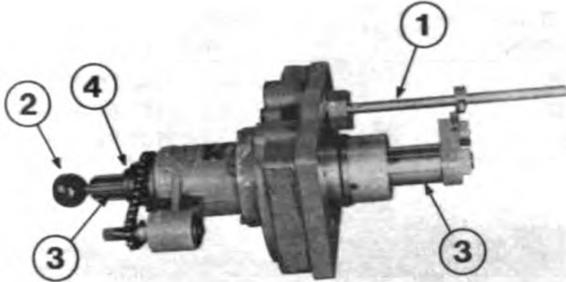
(V10189). Part No. ST-1287 Boring Tool.
